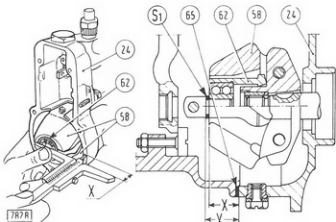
Checking Thrust Sleeve Position Relative to the Governor Body
